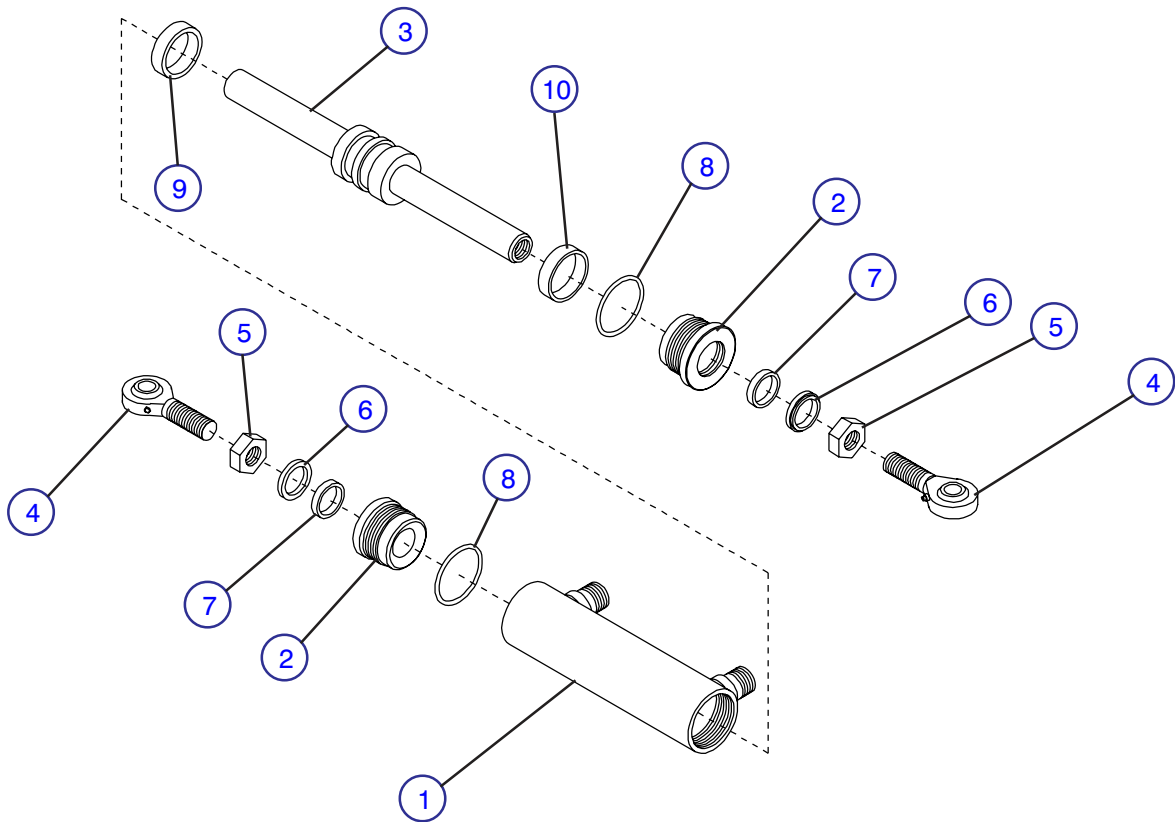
BRAKE CYLINDER ASSEMBLY
